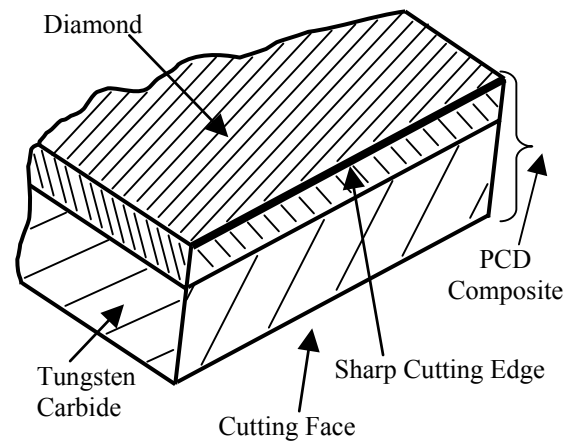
The sharp cutting edge of the PCD cutting tool.
